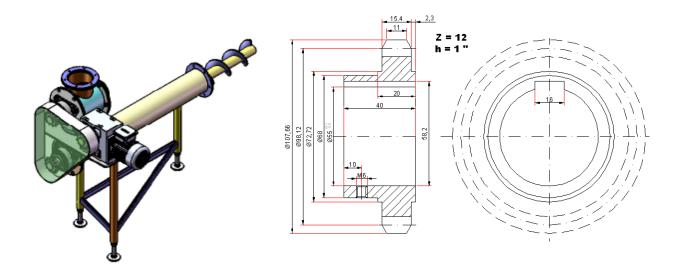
Bearings SKF 722509 DA (screw feeder, rotary feeder)
